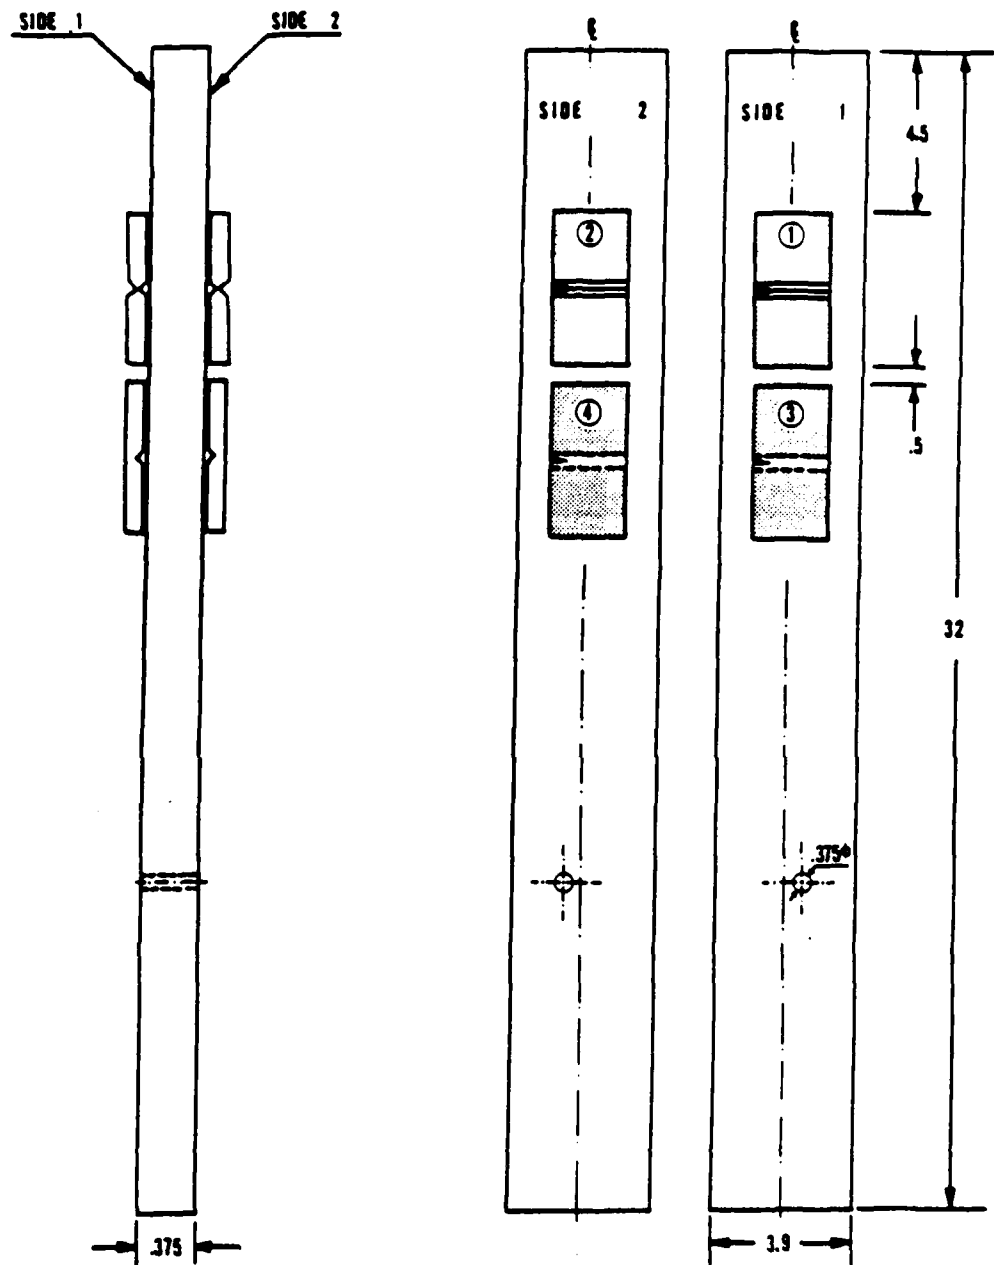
Large carrier specimen with four different double side-grooved crack gage configurations, typical of Tests 28 and 48.
